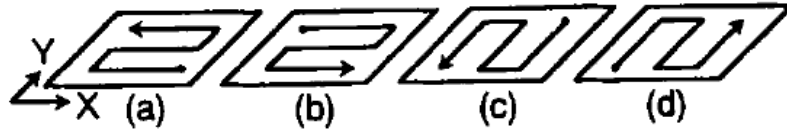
Tool paths for machining parts of body and roof (X-Y plane)
